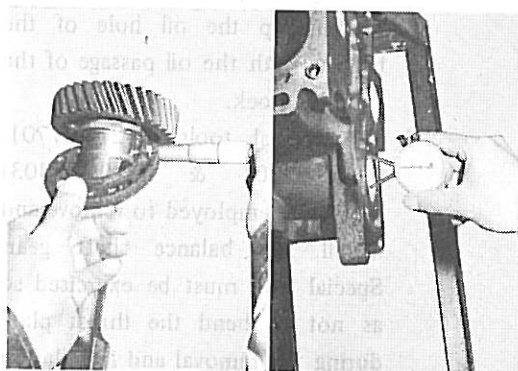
Measuring Balance Shaft Oil Clearance
